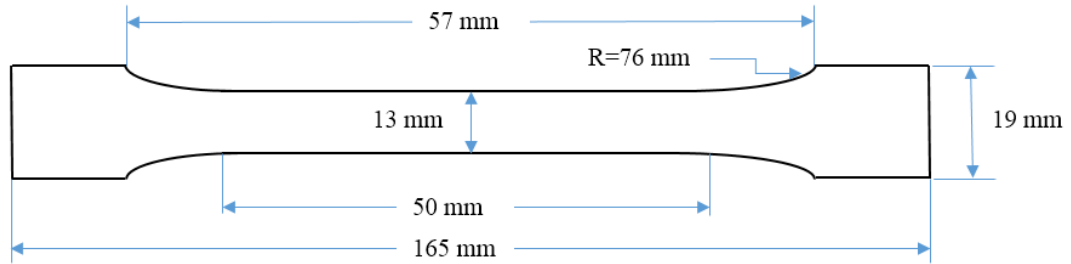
The dimensions of the tensile samples according to ASTM 638-00
